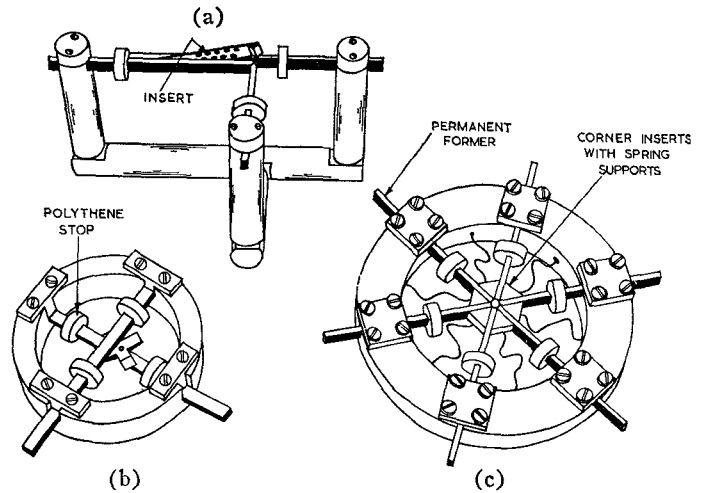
Miscellaneous assembly jigs; (a) multiple-hole directional coupler, (b) cross-over directional coupler, (c) hybrid ring, two of the arms being finally plugged.
